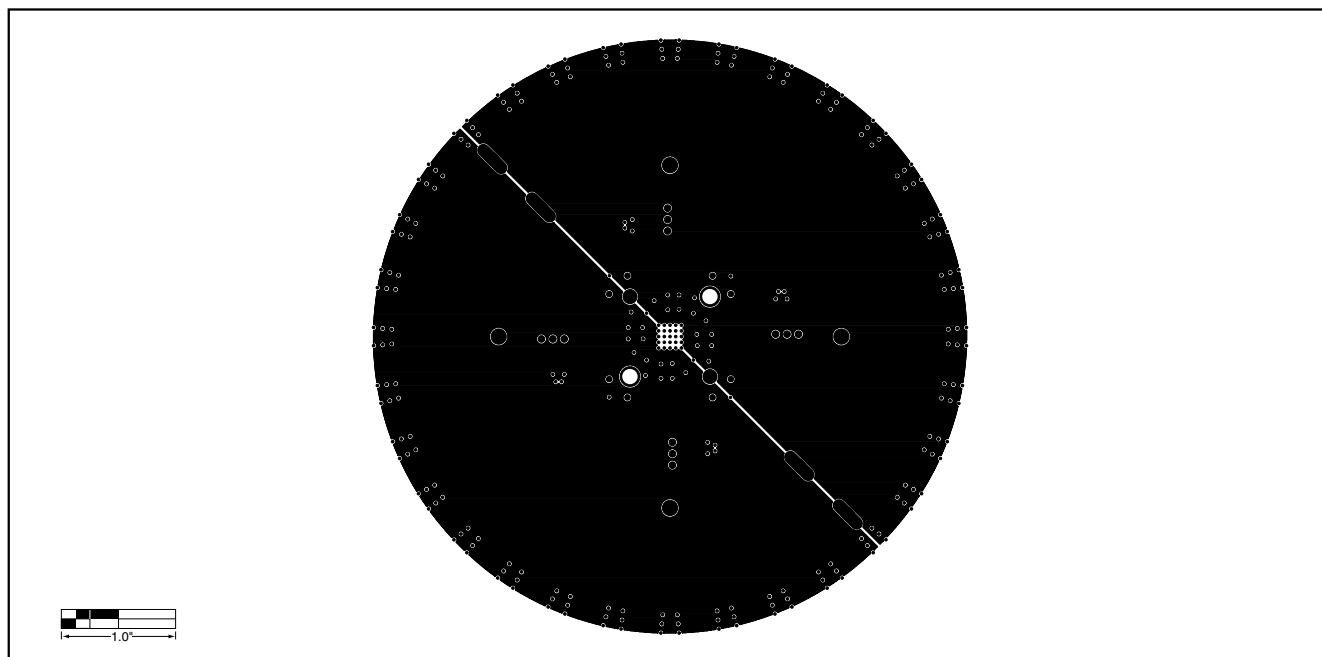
MAX3802 EV Kit PC Board Layout—Power Plane
